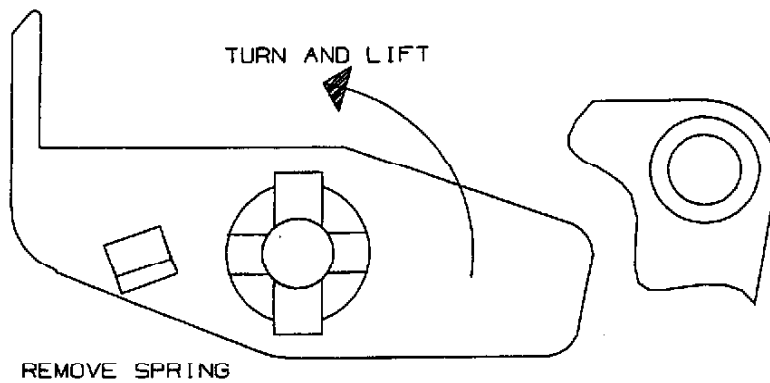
Magnet Plate and Torsion Spring Assembly to Interposer
